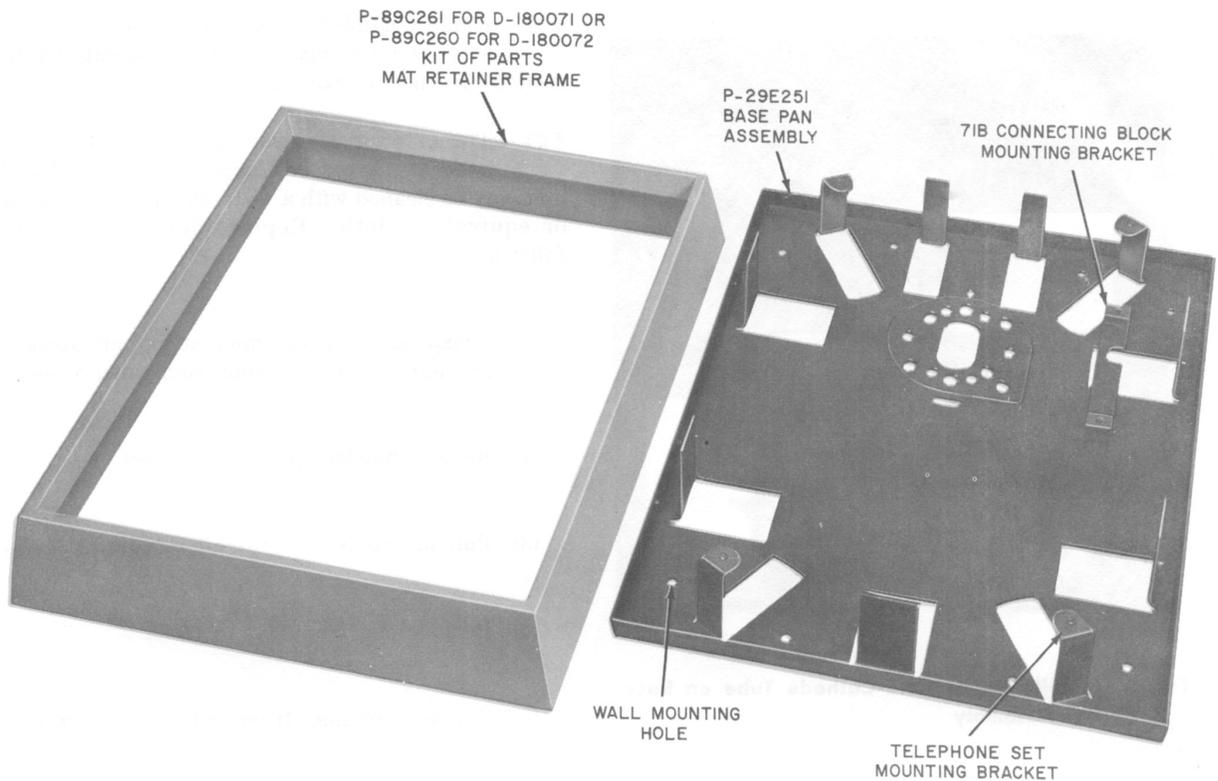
D-180071 or D-180072 Kit of Parts for Surface Mounting
